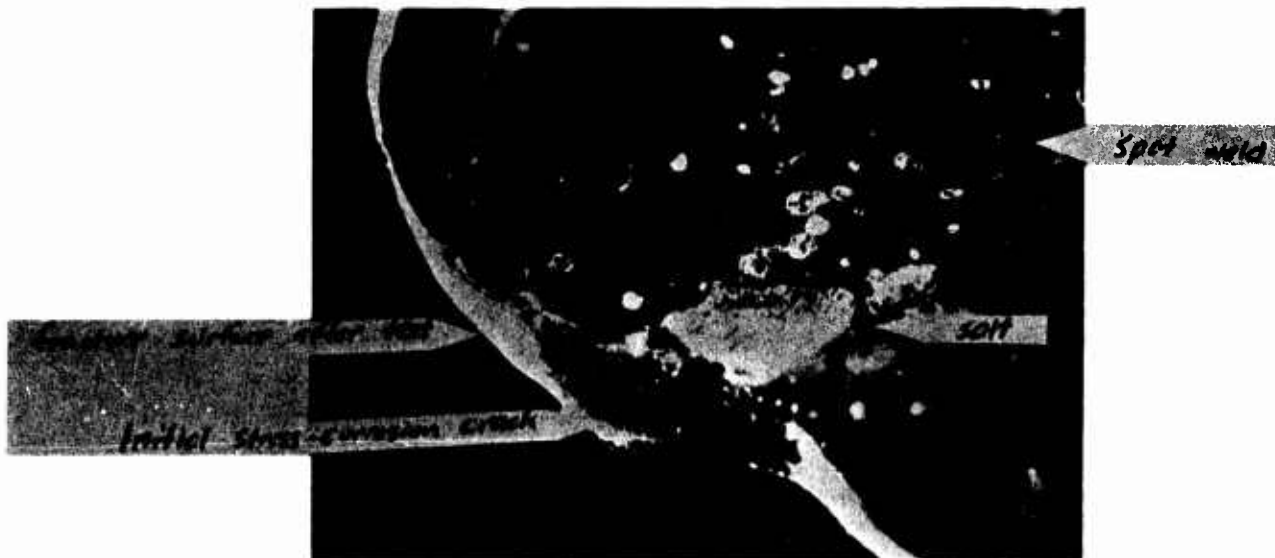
STRESS-CORROSION CRACKING IN Ti-8Al-1Mo-1V SPOT WELD EXPOSED IN HOT SALT AT 600 F FOR 1000 HOURS
